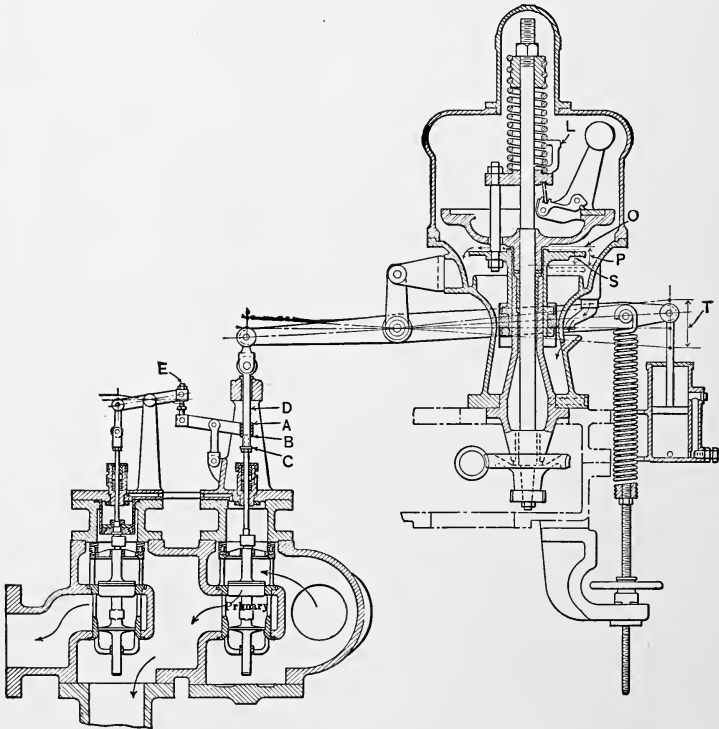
Assembly of Governor Mechanism, Oil Relay Control.
